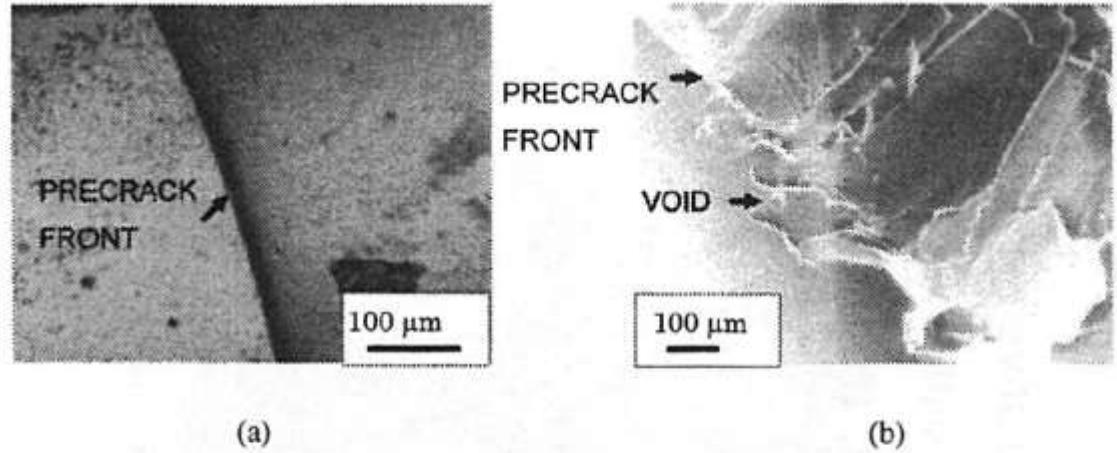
Fracture surface in the striker impact and the laser loading experiments; (a) SP111 loaded by HPB one point impact, (b) SP007 loaded by laser shock waves. The arrows indicate voids that initiated cracks.
